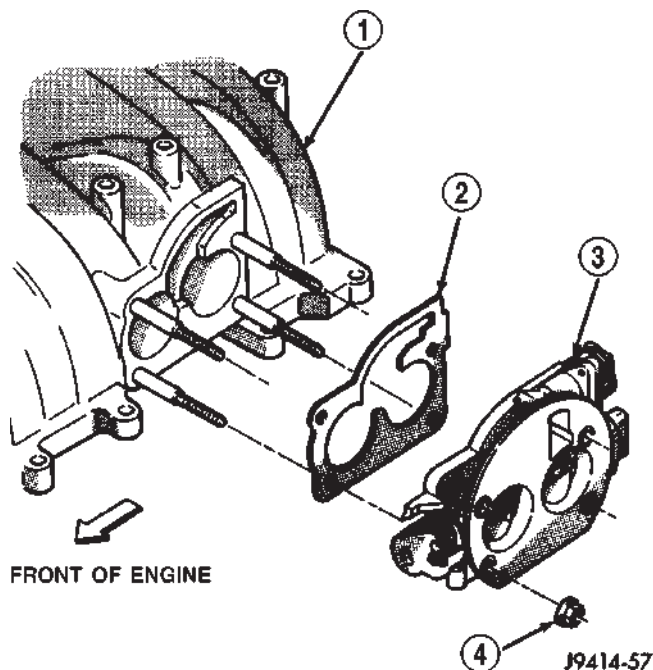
Throttle Body Mounting Nuts—8.0L Engine
